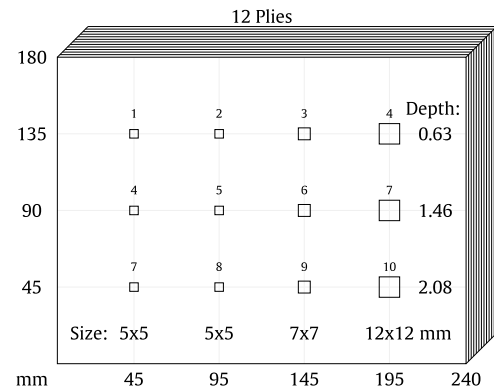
A model of the inspected specimen using step heating, including detailed information about the positions, sizes, and depths of the defects.
